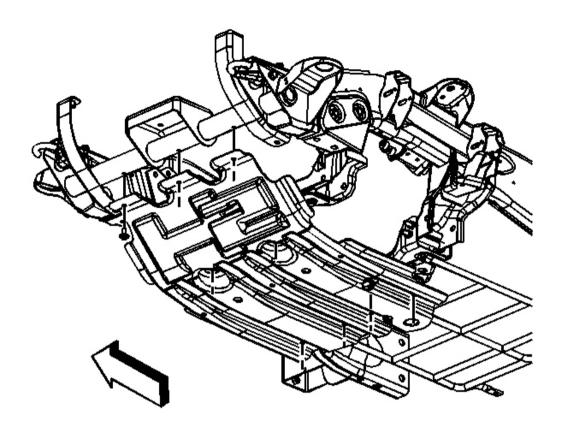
Removing Engine Protection Shield Courtesy of GENERAL MOTORS CORP.
